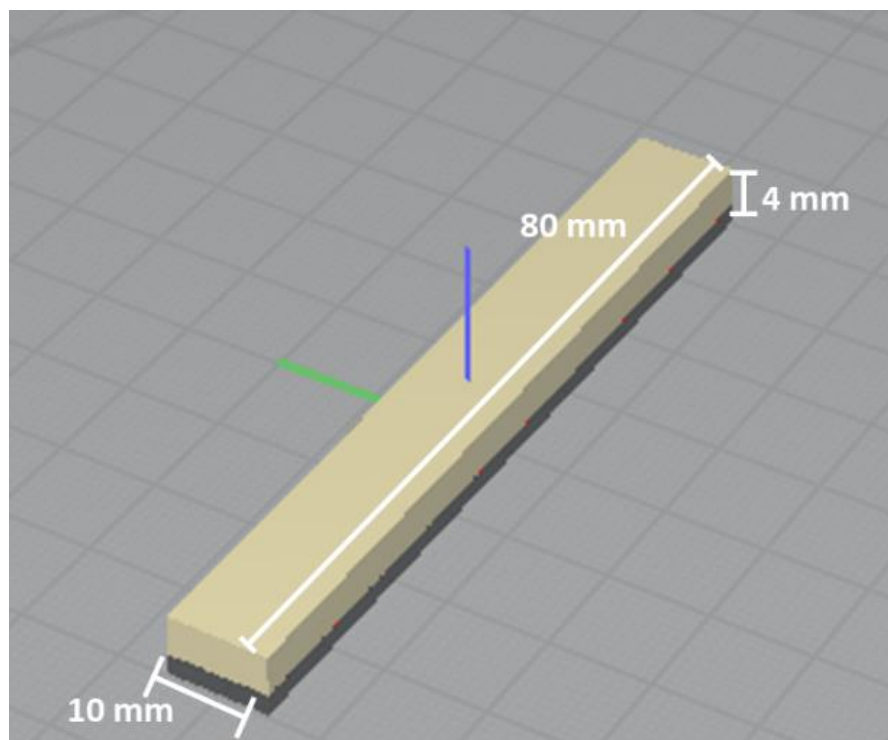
3D model of impact testing sample for 3D printing, labelled with dimensions
